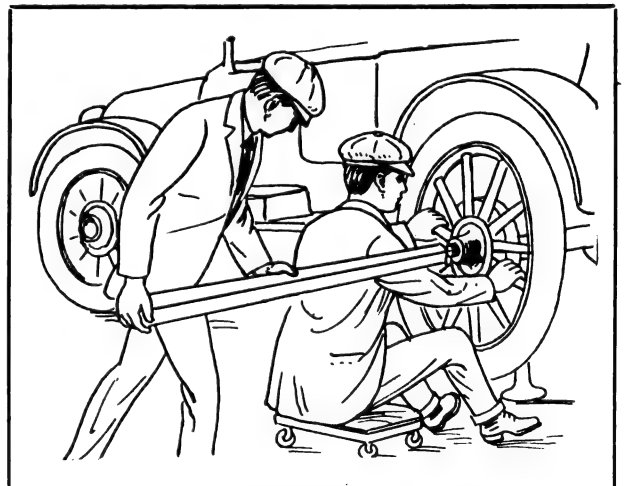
Method of Removing Wheels from Axles Without a Puller.
